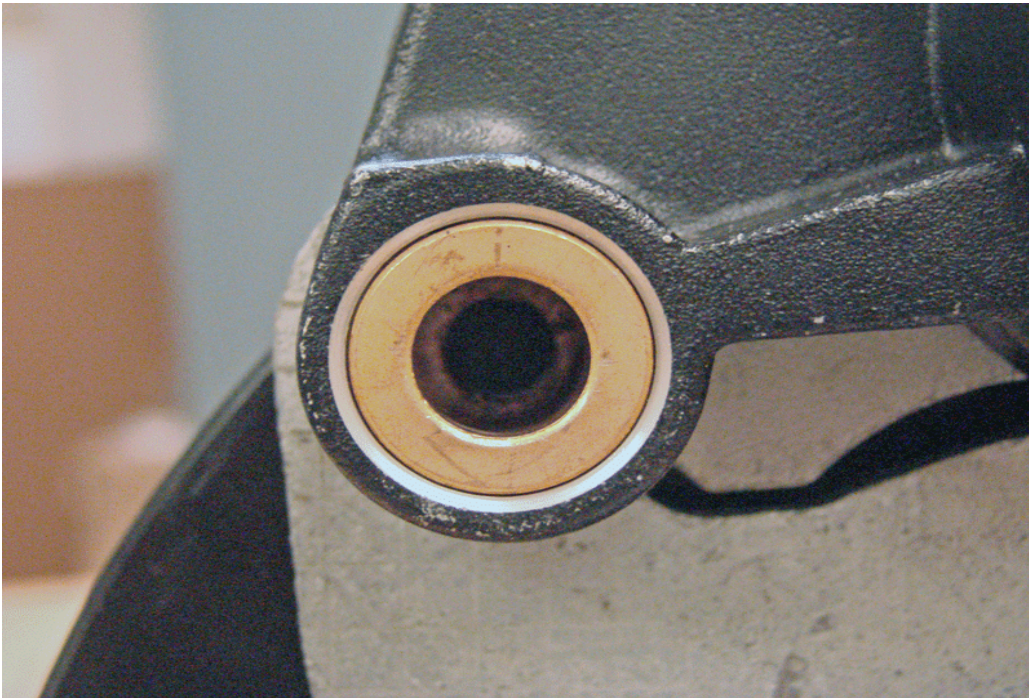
This Photo Shows the Brass Bushing of the Caliper Aligned with the Threaded Hole In the Mounting Bracket. This Alignment Will Allow Easy Insertion and Fastening of the Slider Pins.
